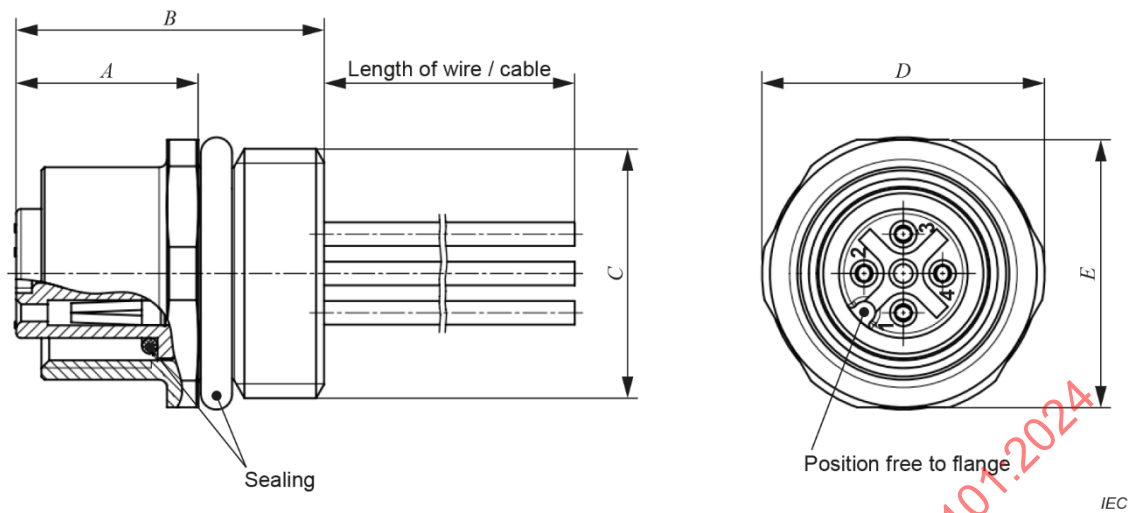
Fixed connector, female contacts, with wire / cable, single hole mounting thread M16 × 1,5
